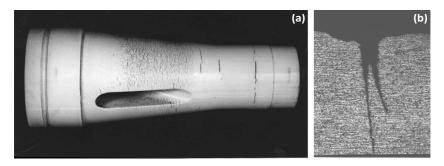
Corrosion fatigue of a pump shaft (a) General appearance (x 0.5) (b) Microsection (x 70).
